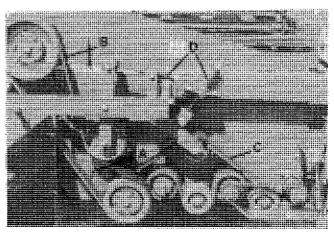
BED CHAIN & GRAB ROLL DRIVE (Shield removed for clarity)
